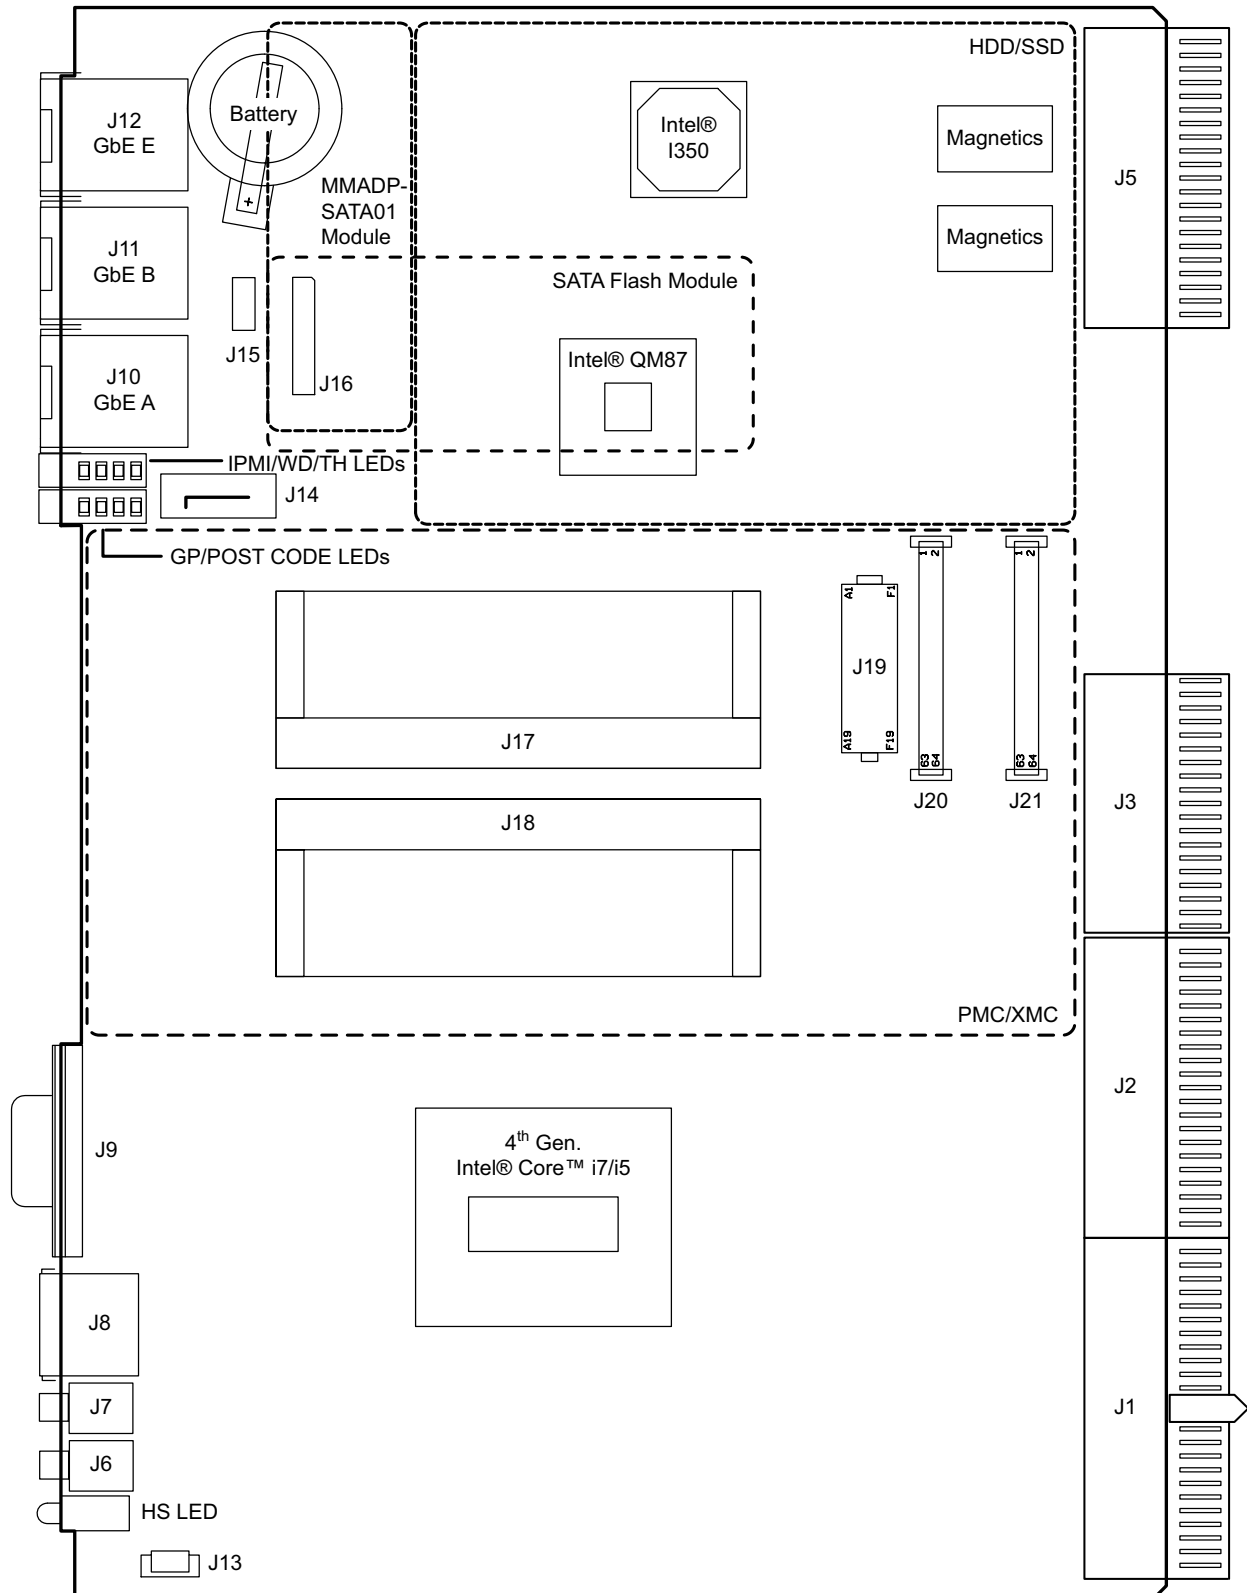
4 HP CP6005X-SA Board Layout (Top View)
